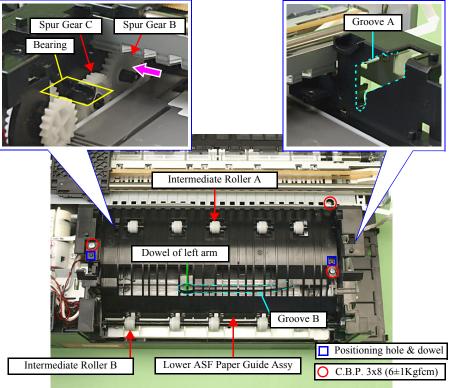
Removing the Lower ASF Paper Guide Assy (2)
